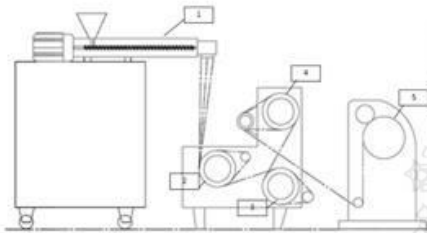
Fiber melt spinning system: (1) Extruder, (2) 1st Hot roller unit, (3) 2nd Hot roller unit, (4) 3rd roller unit, and (5) winding unit
